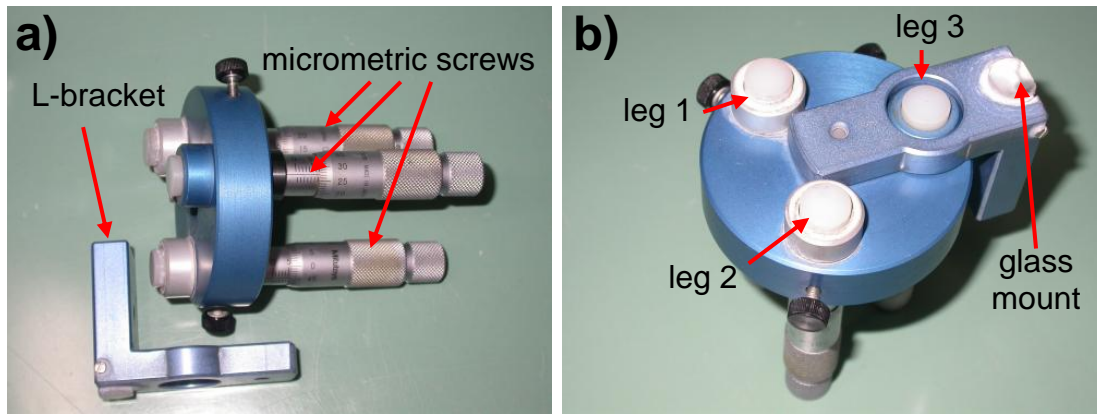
A tripod with a) the L-bracket removed; b) fully assembled
